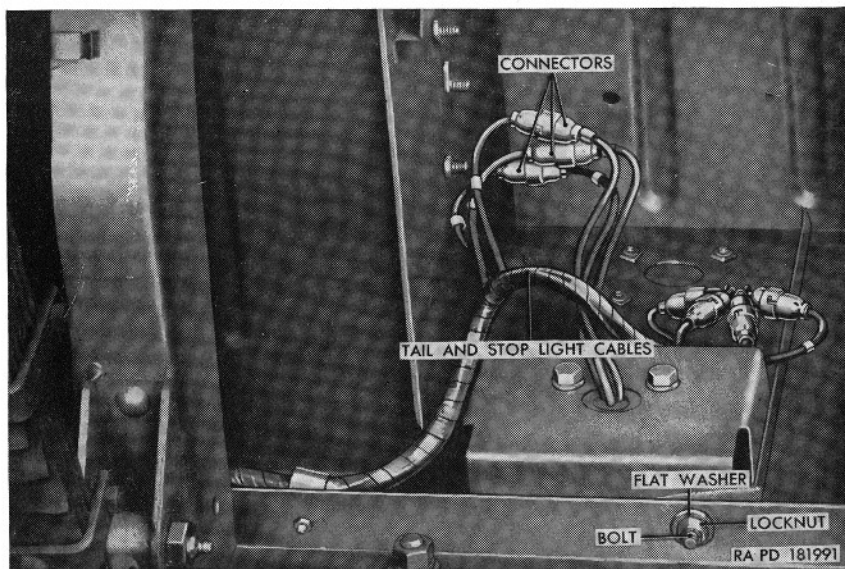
(Added) Body hold-down bolts rear cross member, service tail and stoplight, and trailer electrical coupling cables M170.
